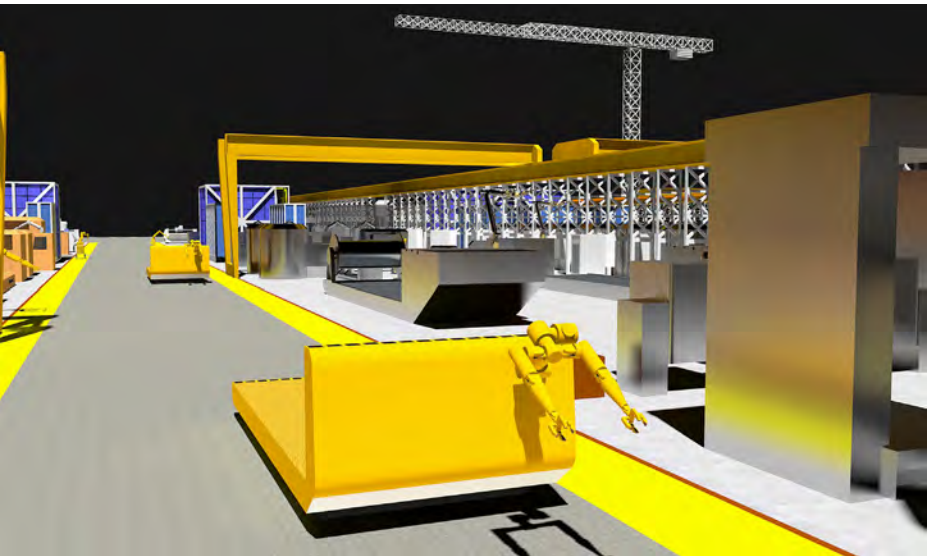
An autonomous carrier moves in front of some aluminium shaping equipment and remelting furnaces. Overhead cranes handle large parts, while the tall crane in the background carries out final assembly of the larger equipment.
